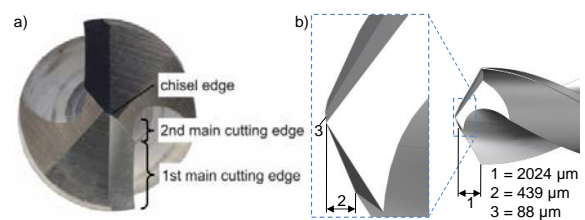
a) Geometry of the drill tip; b) Height of the cutting edge at the drill tip
